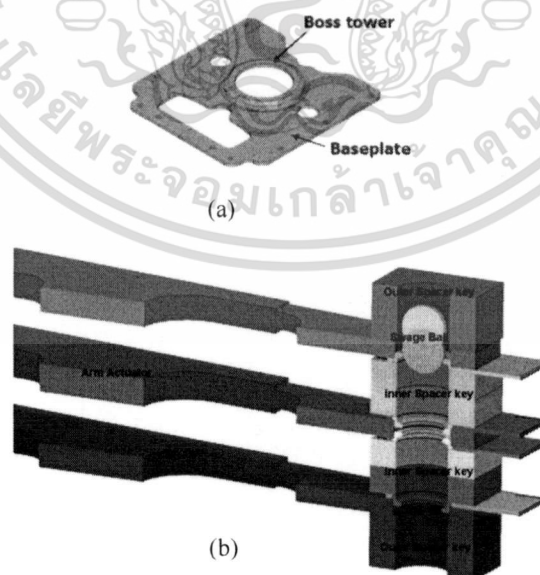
(a) Components of a base plate and (b) the Head Stack Assembly for swaging process
